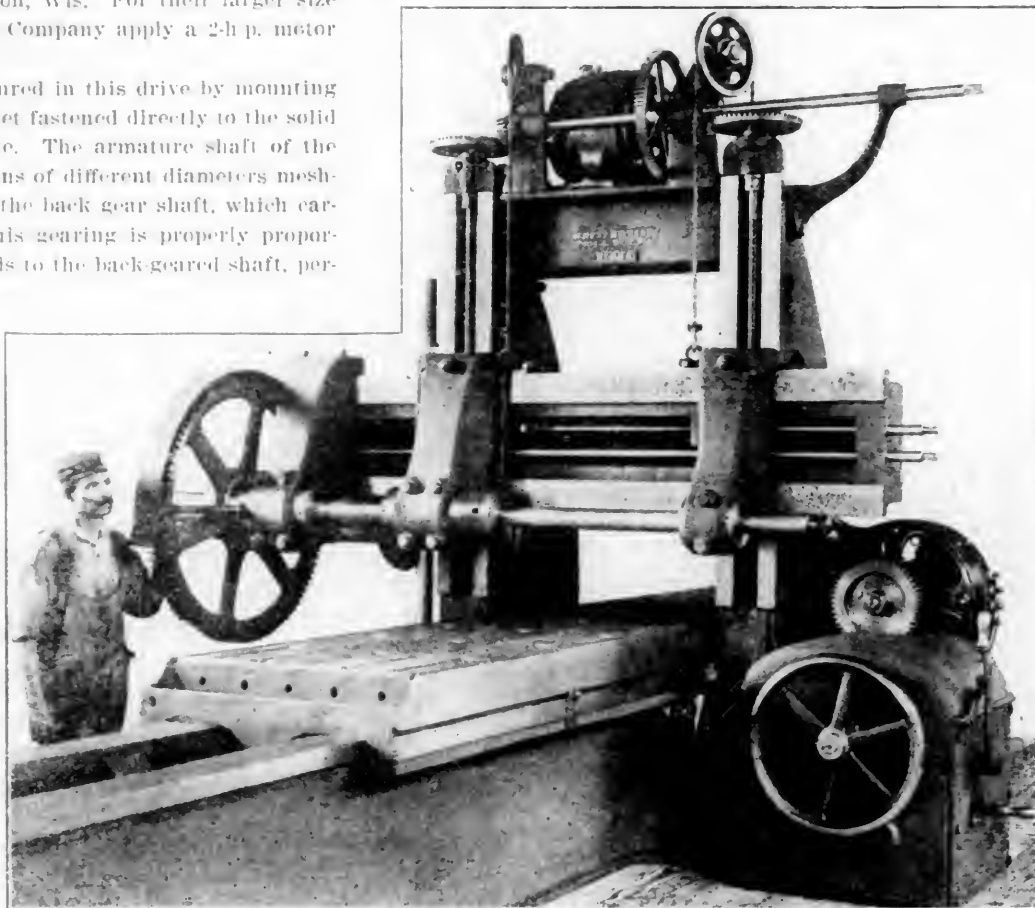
COMPLEX-DRIVE FOR A BEMENT-MILES SLAB MILLING MACHINE. WITH SEPARATE MOTORS FOR SPINDLE, TABLE FEEDS AND ELEVATING CROSS RAIL. GENERAL ELECTRIC MOTORS.
